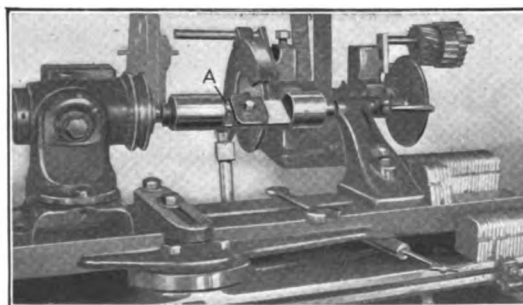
GRINDING THE SIDES OF SHELL CUTTERS ON GRINDING ARBOR
